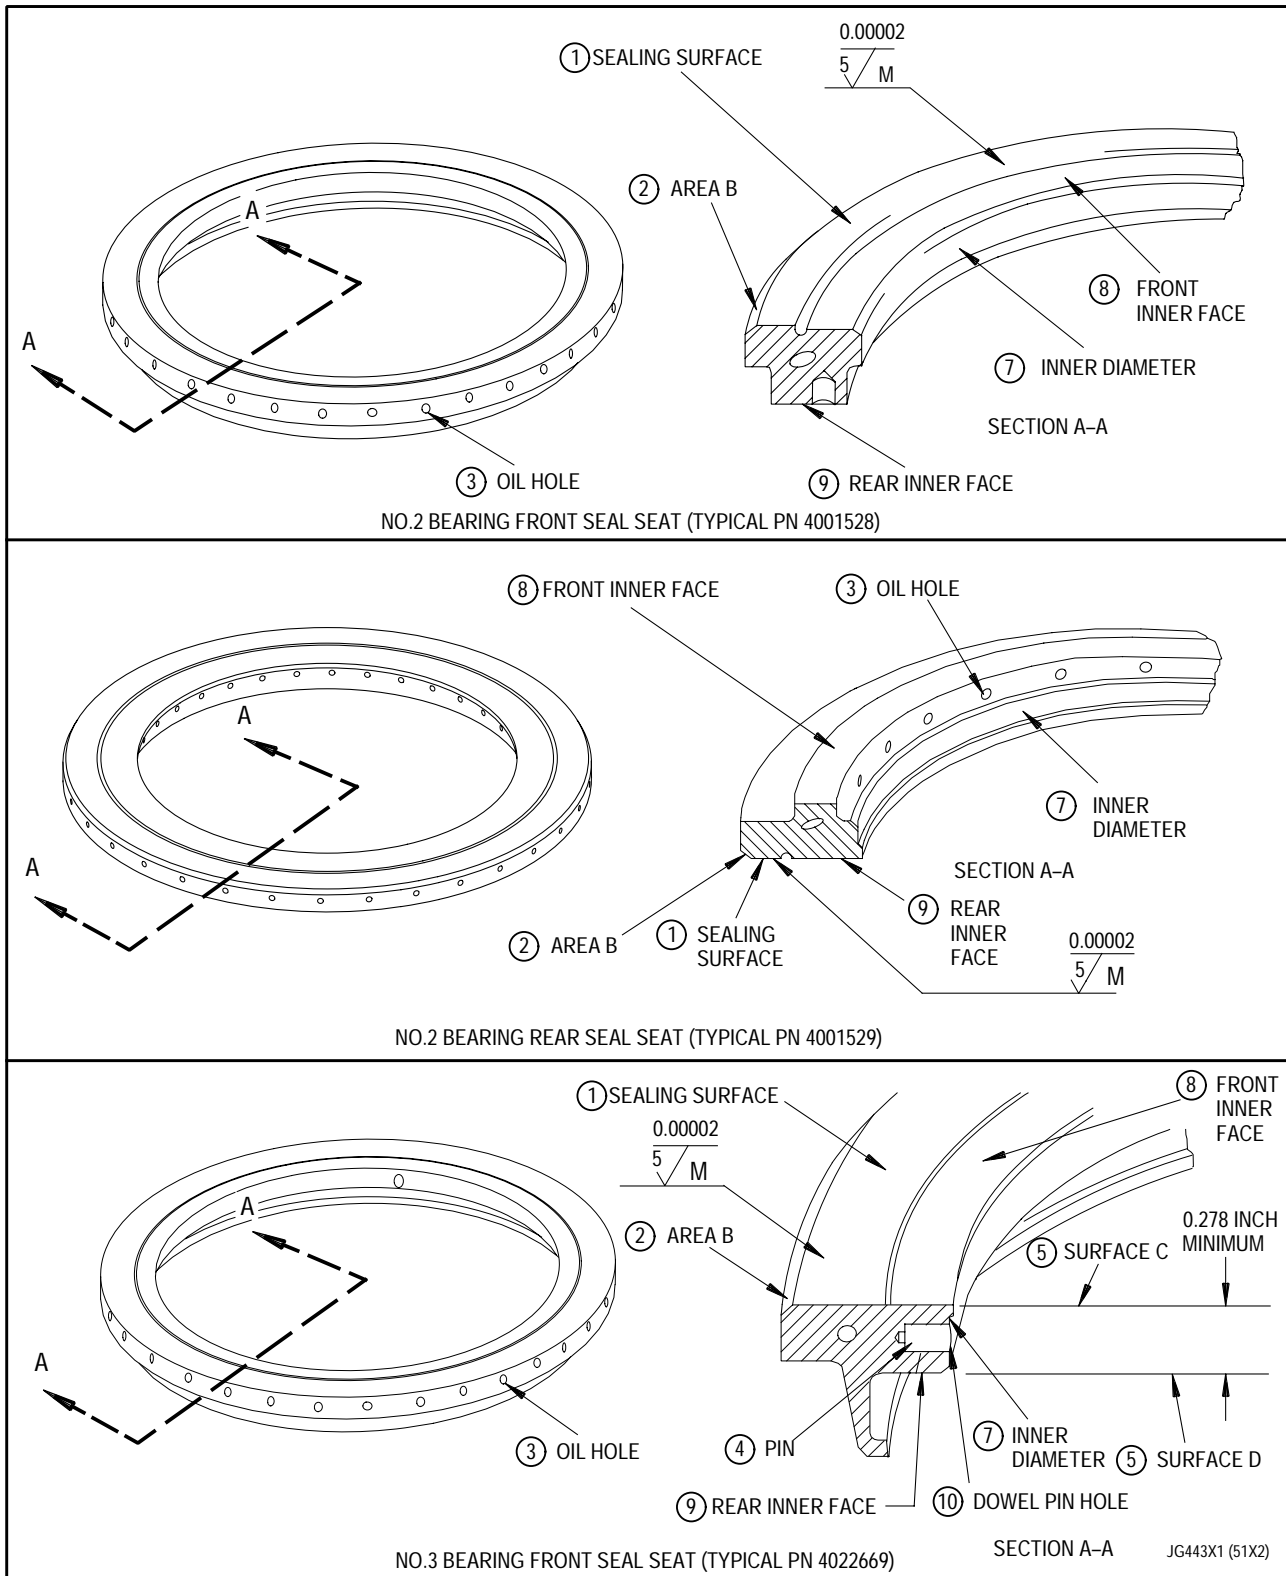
No. 2, 3, and 4 Bearing Seal Seats - Inspection (Sheet 1 of 2)
